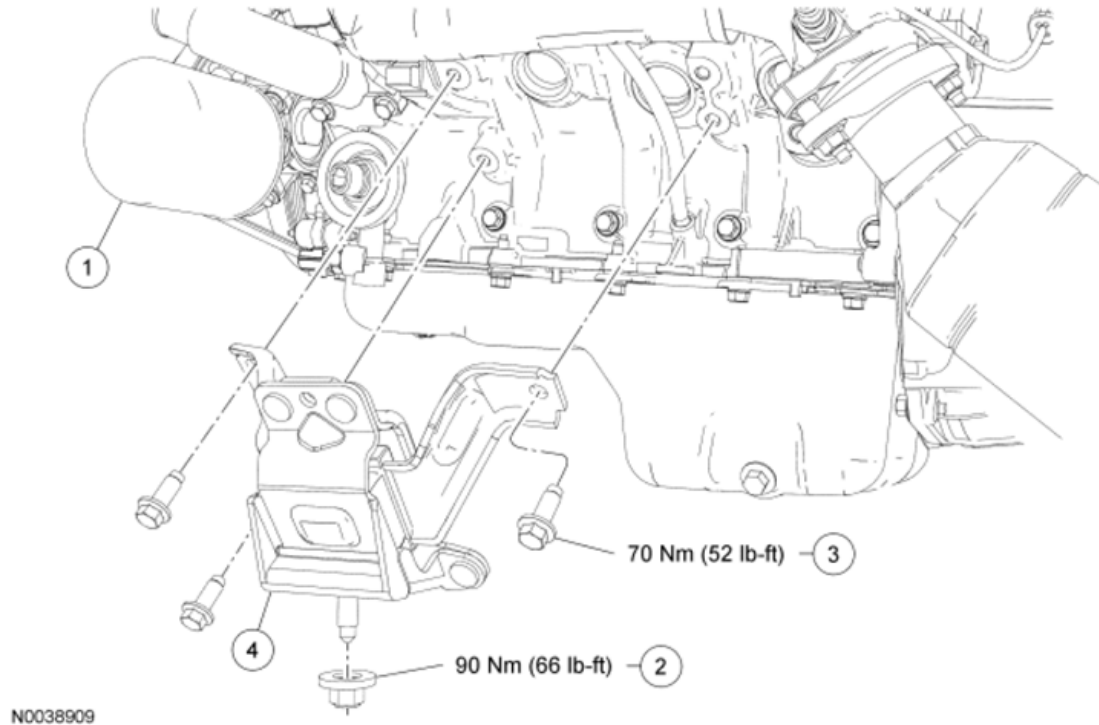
Exploded View Of Engine Mount With Torque Specifications (LH)
